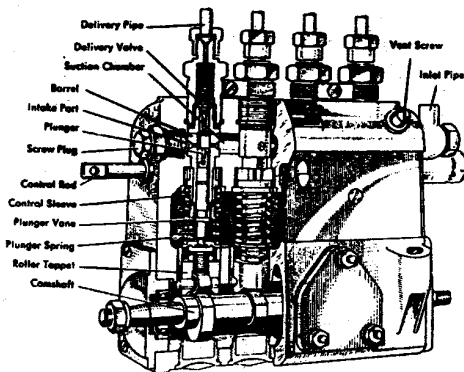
American bosch type APE diesel injection pump for four cylinder engine.
